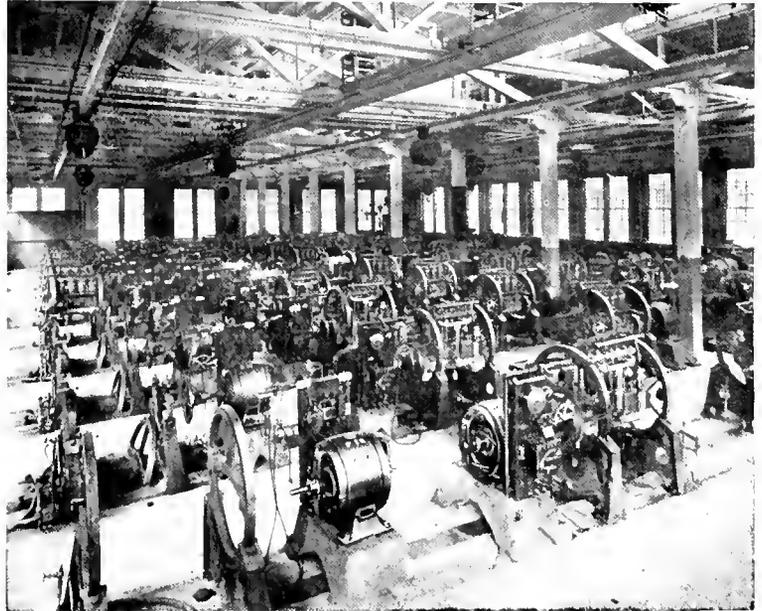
Engine Testing Dynamometer, Cadillac Company, Detroit
